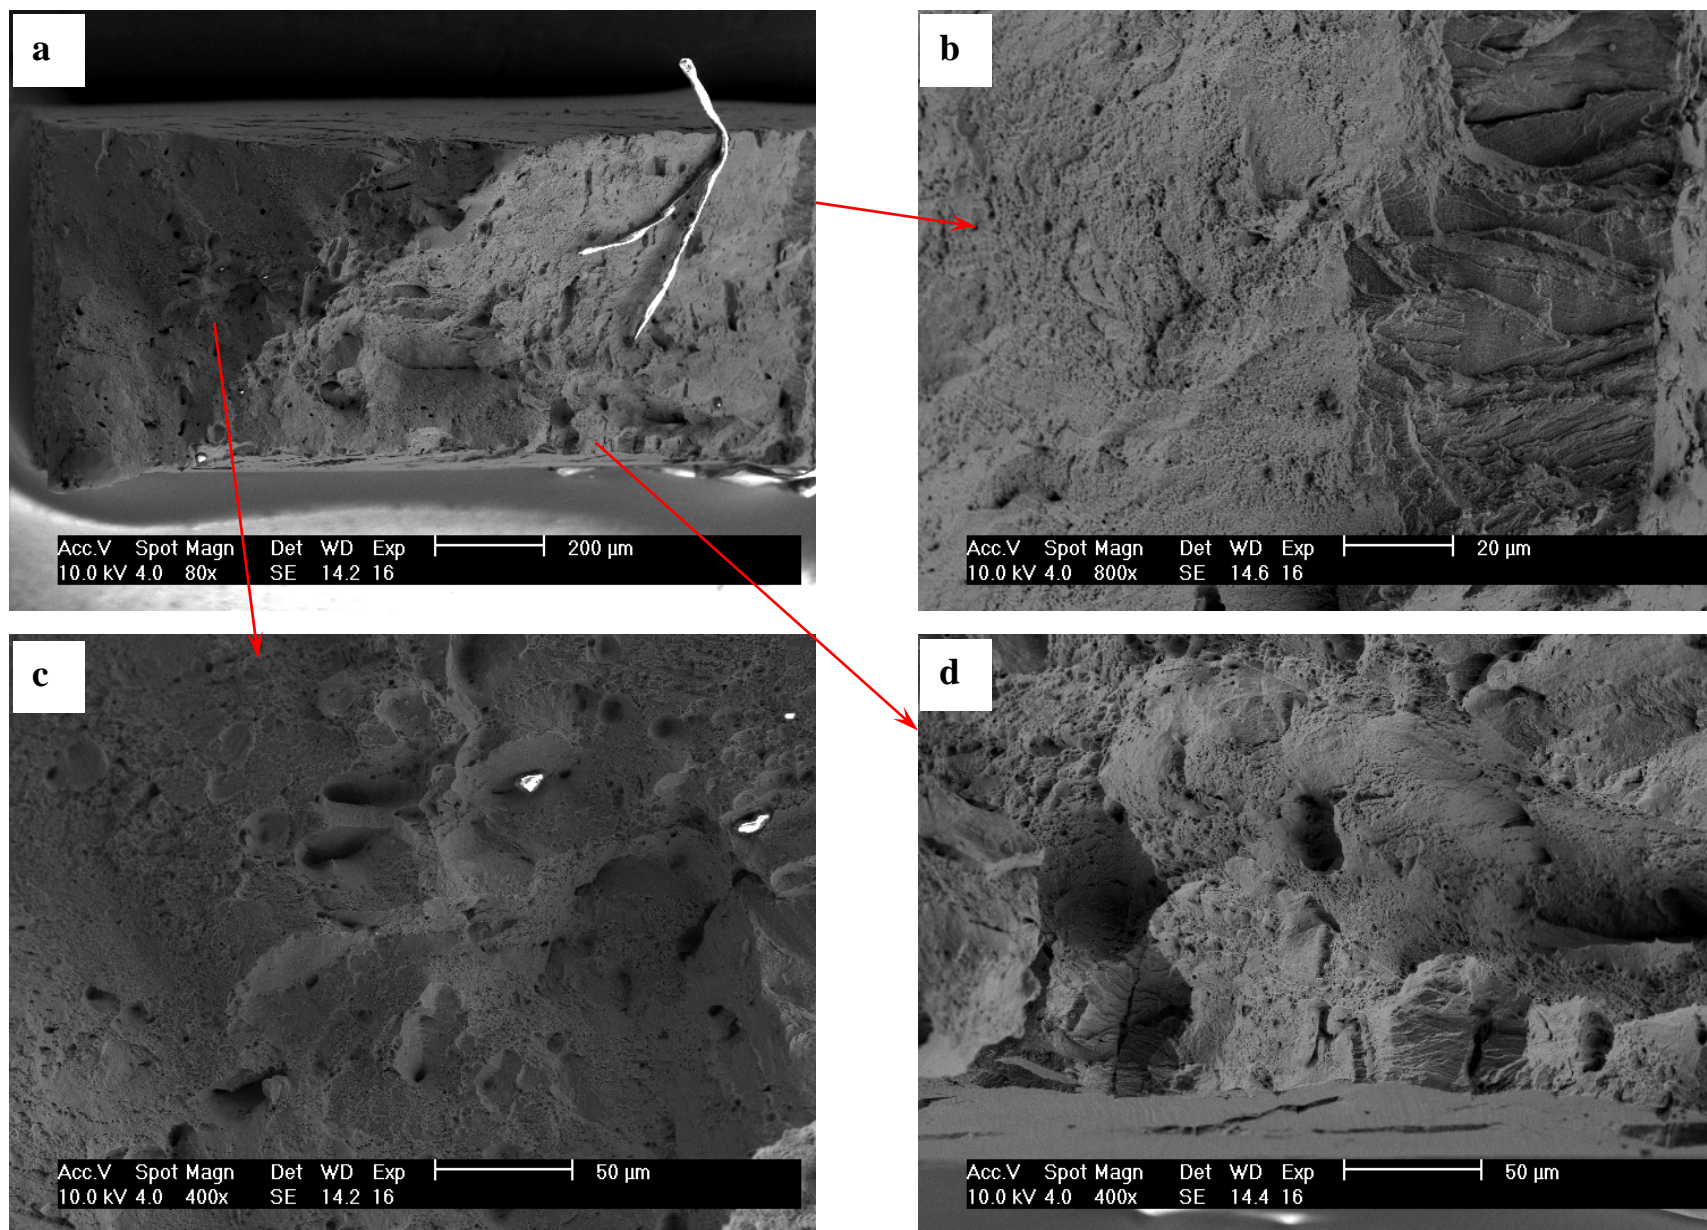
Fracture surface of CW Type 347 SS irradiated to 10.2 dpa and tested in PWR water (specimen D2-3).
